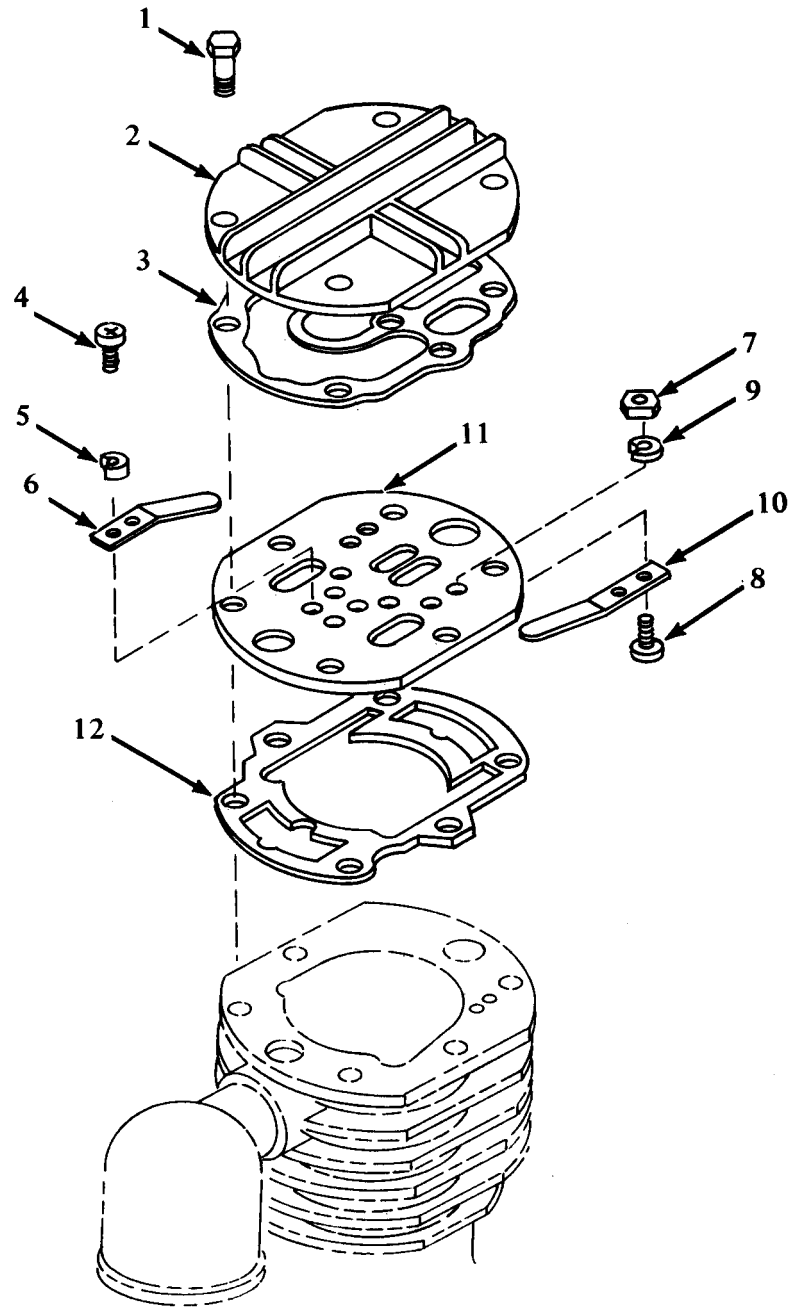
Cylinder Heads, Intake and Exhaust Valves (Sheet 1 of 2)
